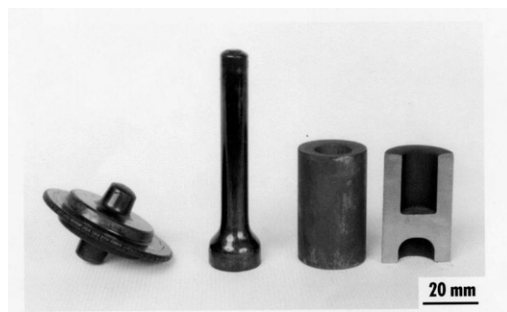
Examples of trial parts formed by hot-working of as-sintered billets.
